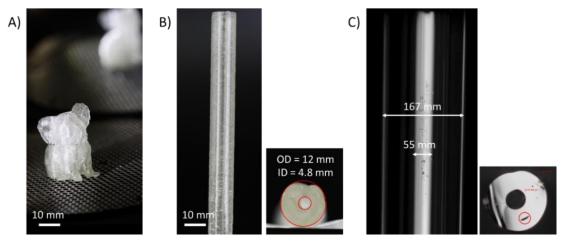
A) 3D printed glass Koala, B) 3D printed tube preform, length ~100 mm. C) A capillary fibre drawn from (B), with outer diameter of 167 μ m.
